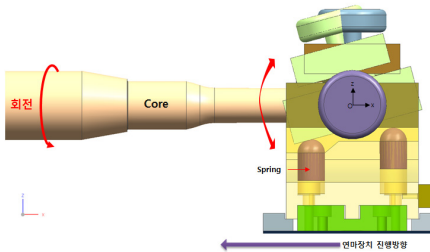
Feature of fabrics sandpaper clamp in automated polishing apparatus
